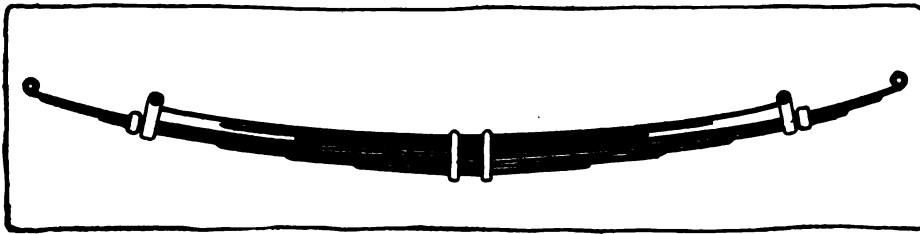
Andersen auxiliary spring that is designed to carry light and heavy loads equally well
